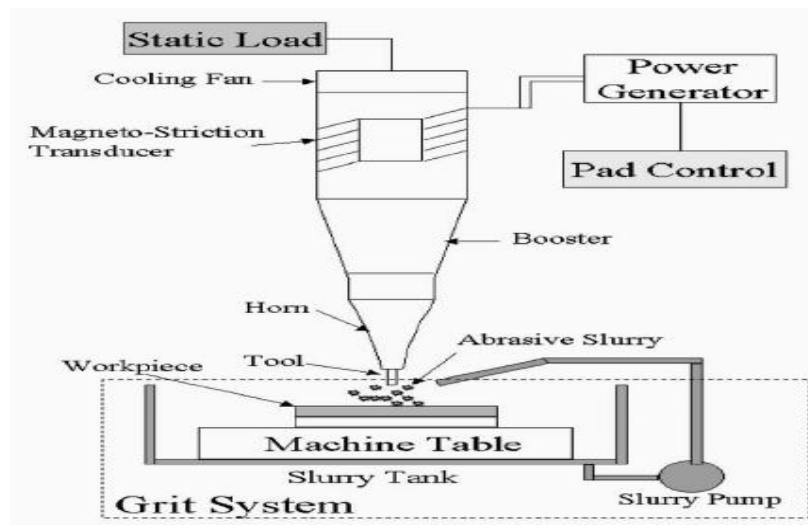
Basic features of the ultrasonic machining process [Advanced Machining Processes: Non-traditional and Hybrid Machining Processes, McGraw-Hill Prof Med/Tech, 01-Mar-2005 Vol 1 Page No156]
